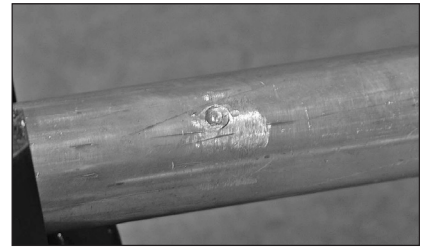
Peen edge of filler hole over top surface of plug.
